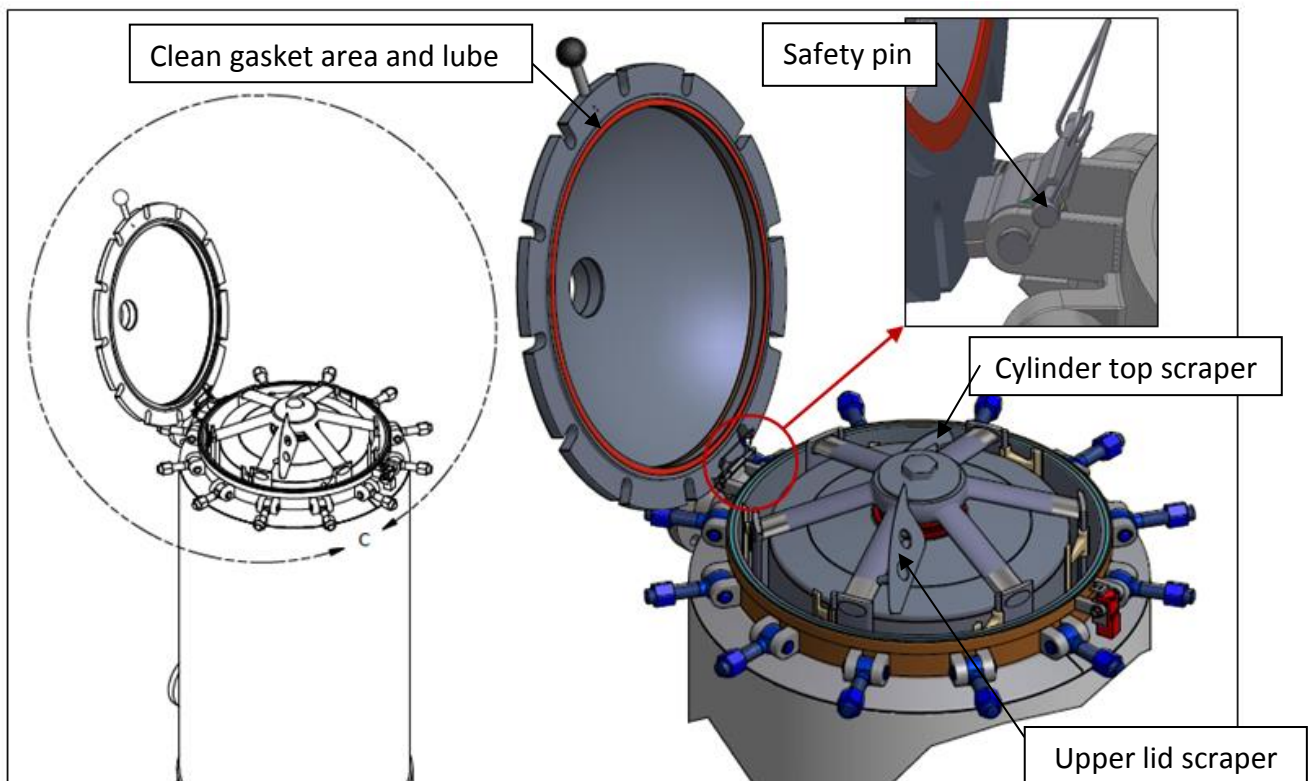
Remove Safety Pin, Wipe gasket and lube
